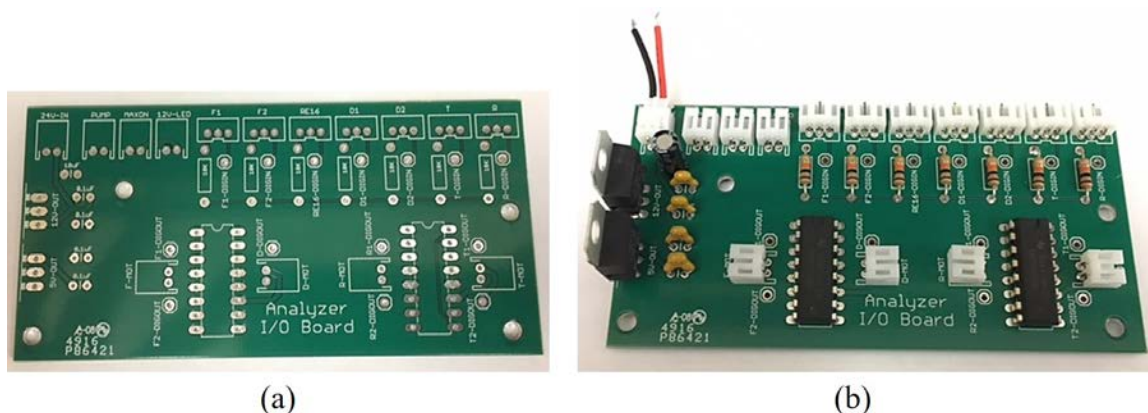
Fabricated PCB: (a) before and (b) after assembling the components.
